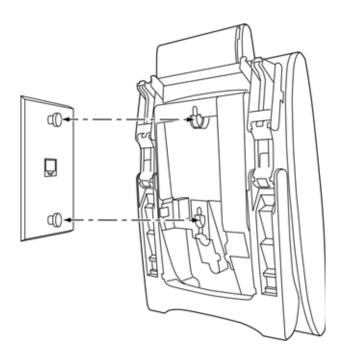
Mount Multiline Terminal Wall on Wall Plate
